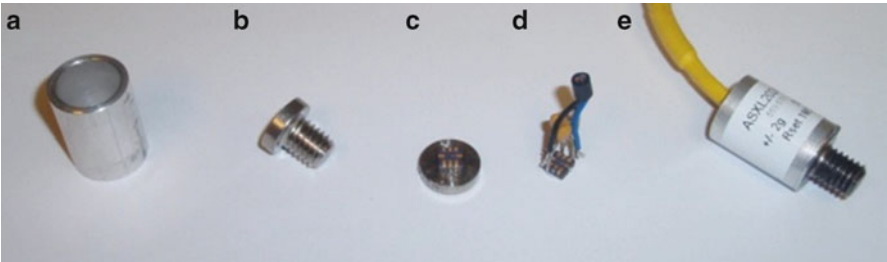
MEMS packaged sensor components: (a) sensor outer casing (mild steel), (b) threaded mounting bottom plate, (c) flat mounting bottom plate with MEMS affixed, (d) MEMS with components attached, (e) Packaged MEMS sensor
